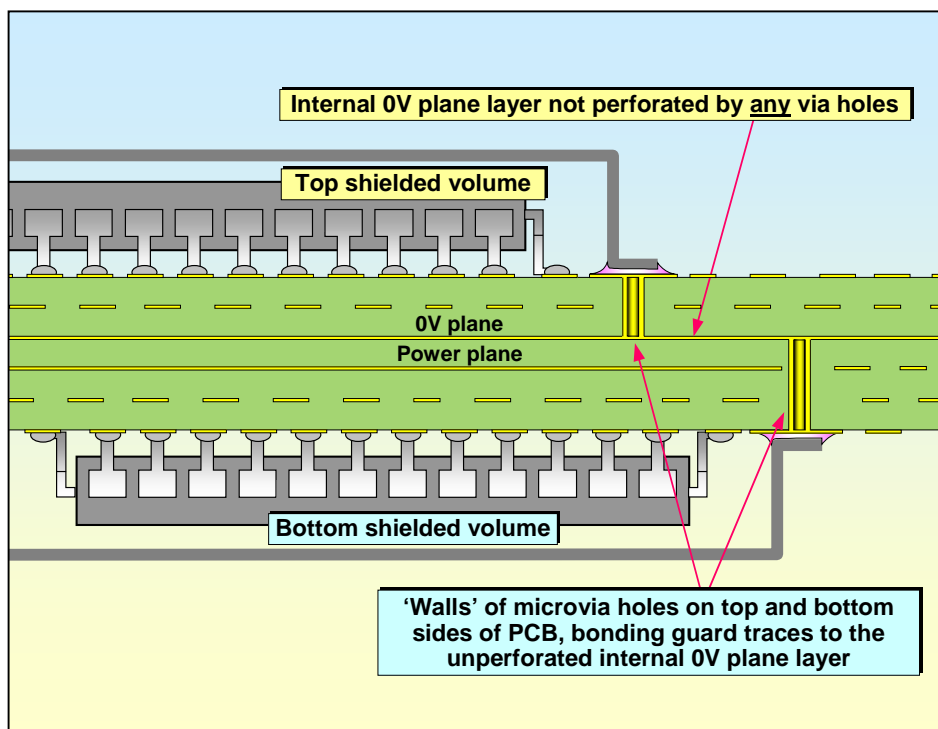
AR Example of double-sided shielding using microvia (HDI) PCB technology
